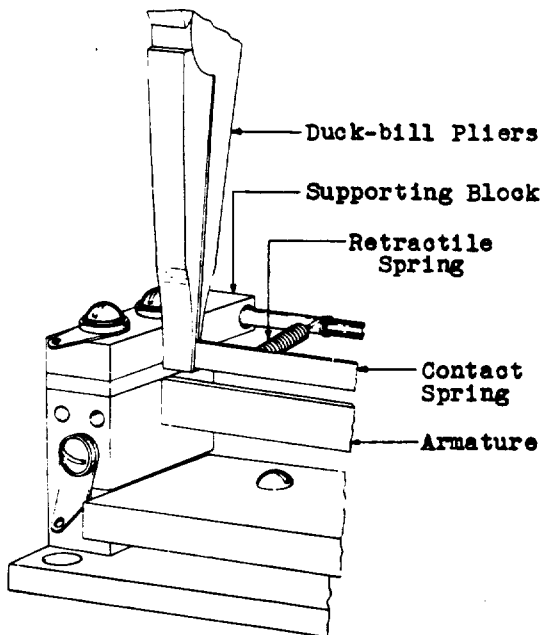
Method of Adjusting Contact Spring for Vertical Contact Alignment
